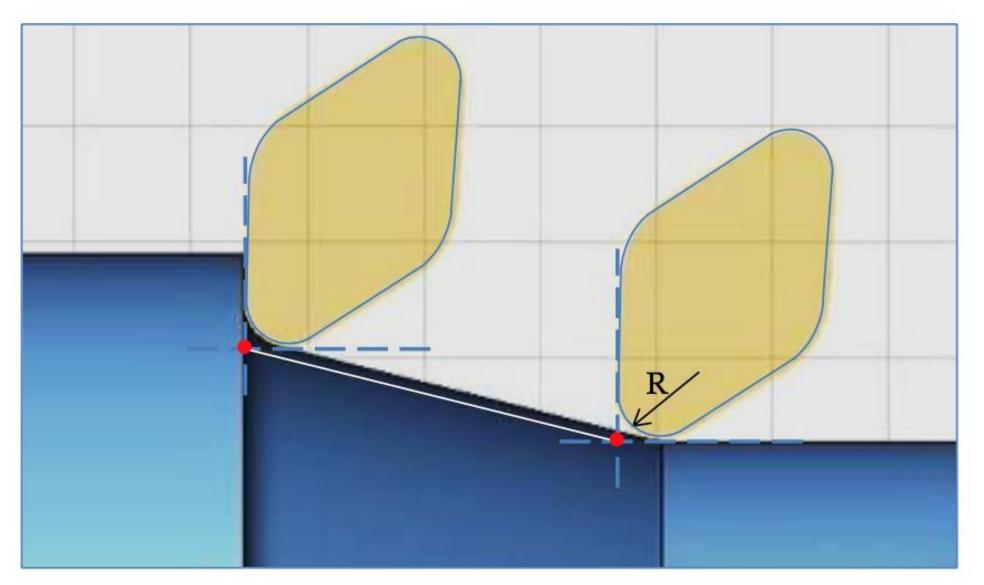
Dimensional error caused by the insert radius during the execution of conical turnings
